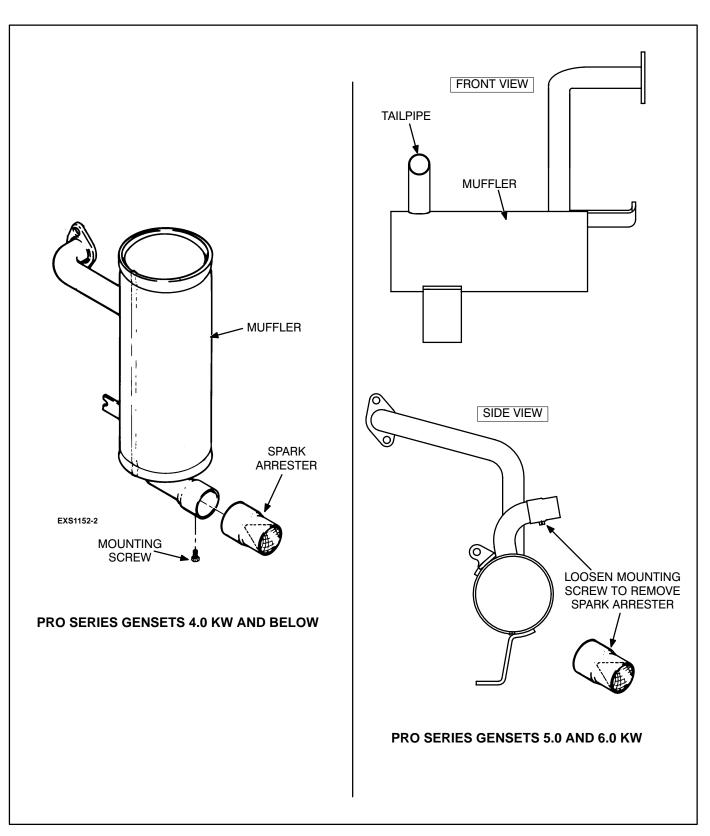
TYPICAL MUFFLER ASSEMBLIES
